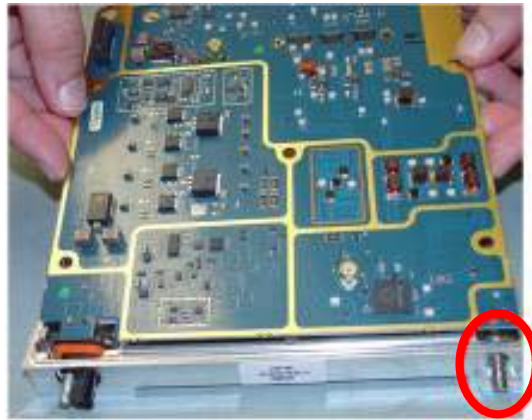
Placing the transmitter board onto the Transmitter Cover
